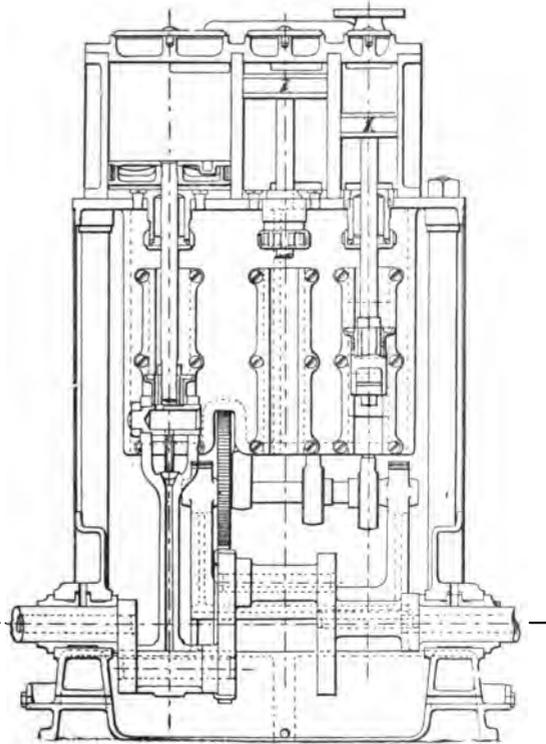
SECTIONAL VIEW OF COULTHARD'S HIGH SPEED TRIPLE EXPANSION ENGINE.
